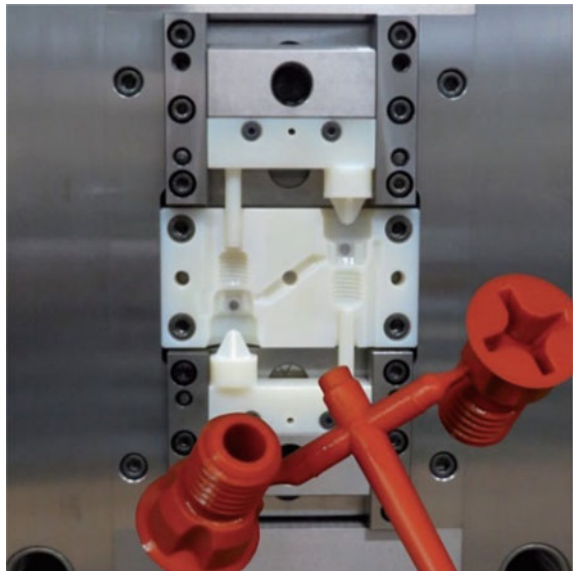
PolyJet mould inserts embedded into steel mould block (Courtesy of StratasyS)
